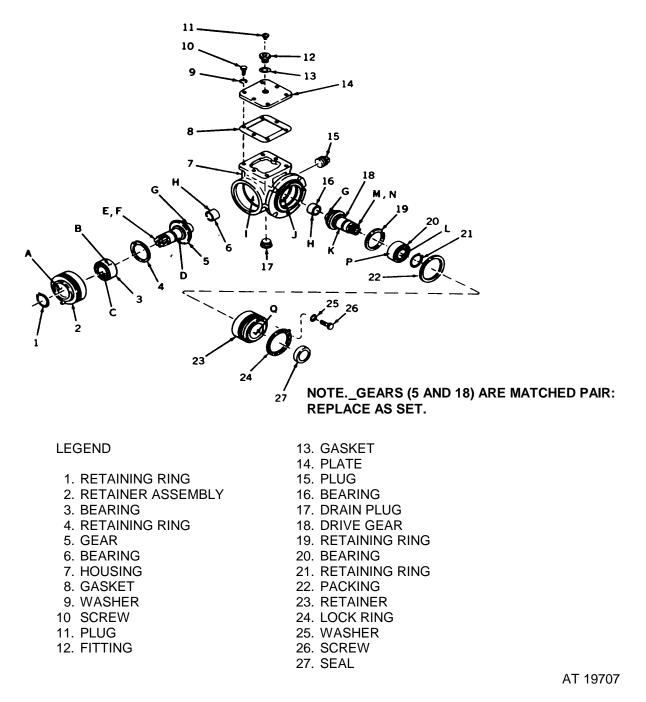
Disassembly or assembly of right-angle drive power takeoff.
